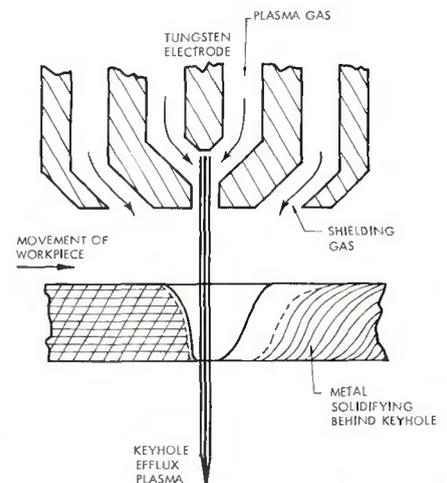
The keyhole mode in plasma arc welding
